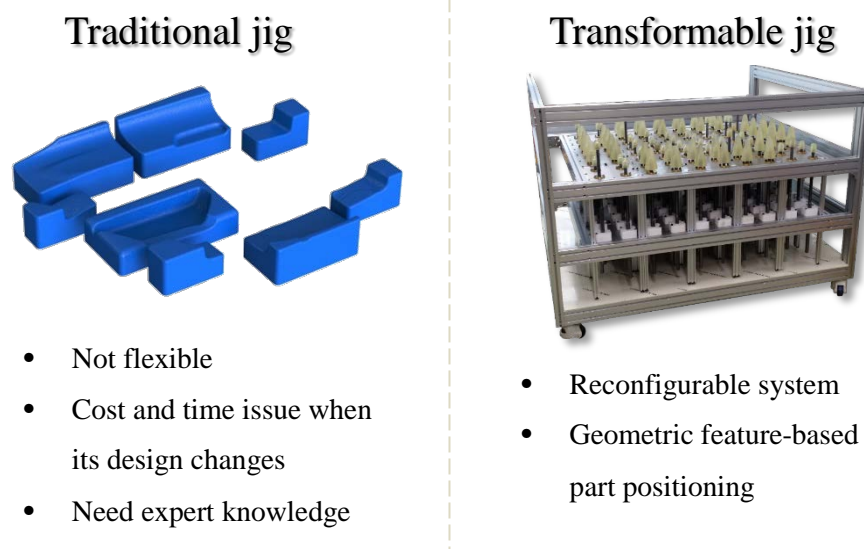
1 Traditional jig and transformable jig for inner cart part assembly
